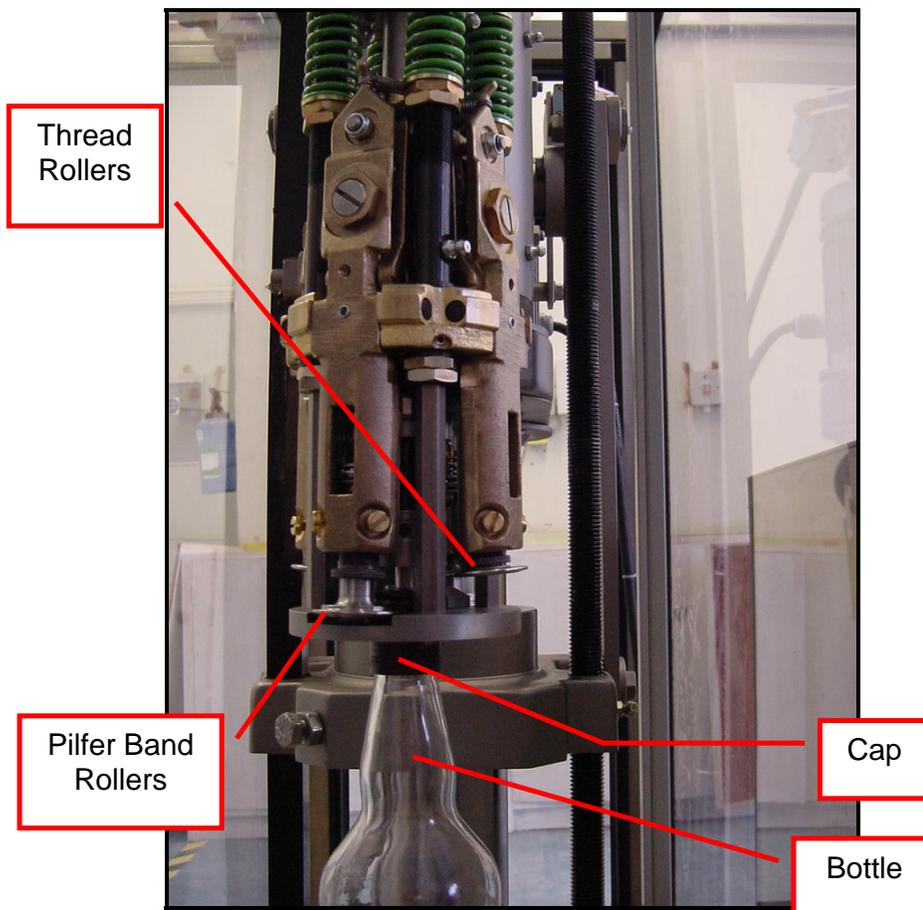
A single head capping machine used to roll thread and pilfer proof band into the closure.
